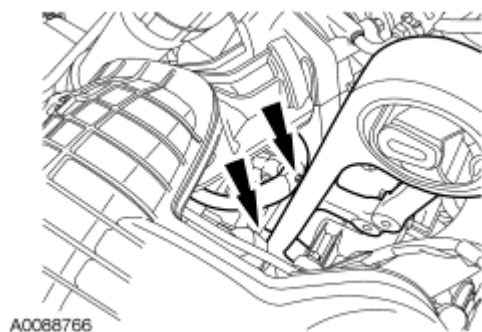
Locating Wiring Harness At Roll Restrictor Bolts
